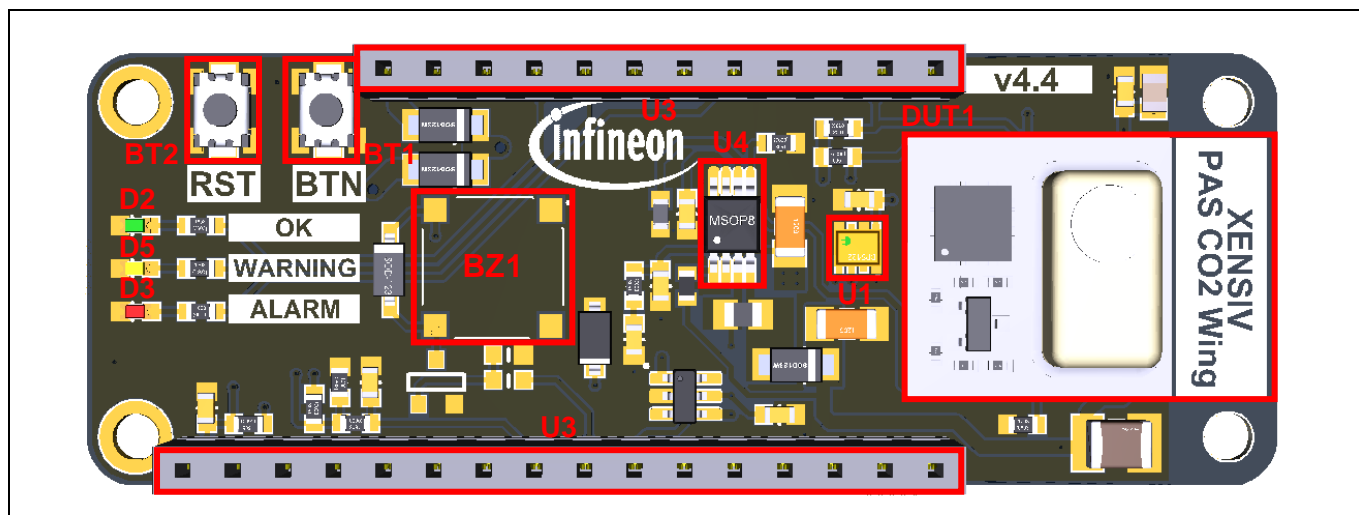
Front view of the XENSIV™ PASCO2V15 Wing board
